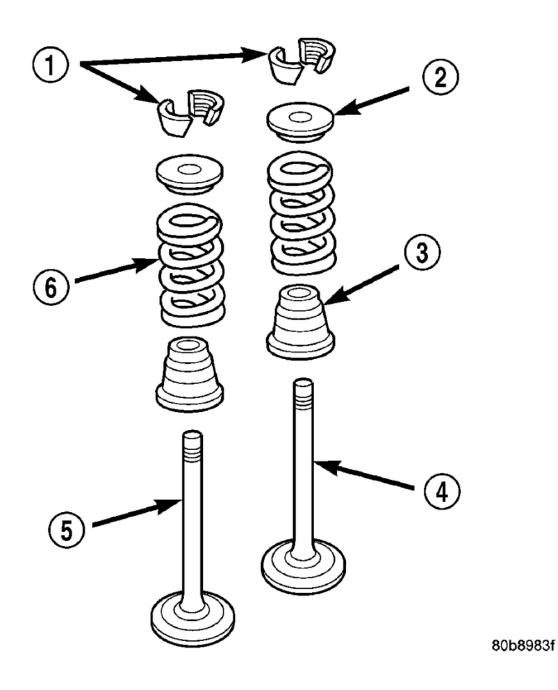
Valve Assembly Configuration Courtesy of CHRYSLER LLC
